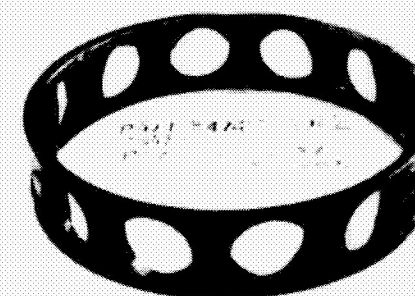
Posttest Appearance of Irradiated PI-Glass Ball-Bearing Retainer S/N 880003 Showing One Delaminated Area and Adjacent Separator Section About to Fail
